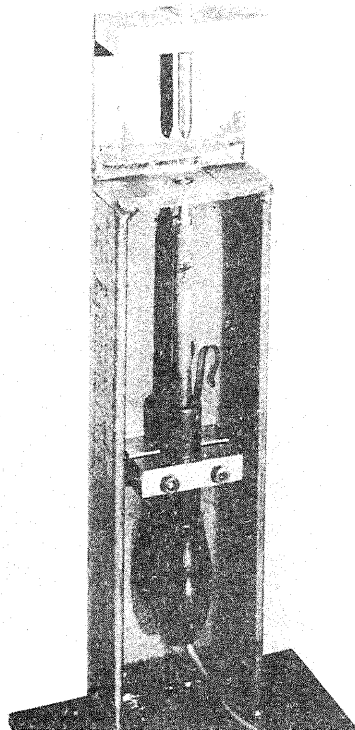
SOLDERING IRON FIXTURE FOR ALLOYING EXPERIMENT
